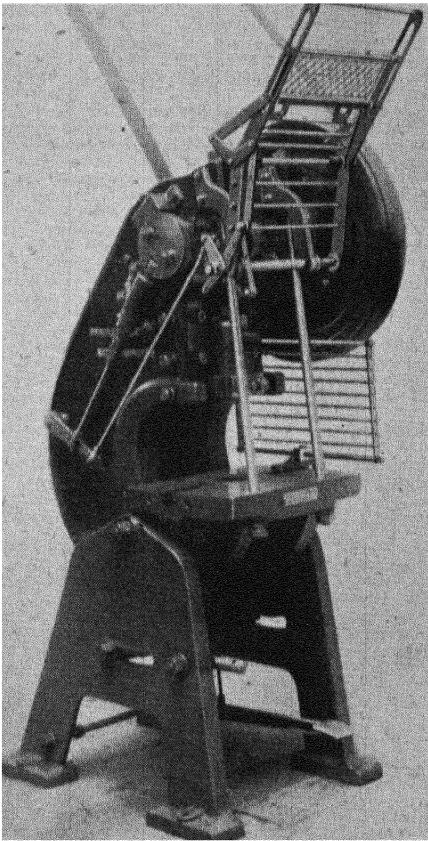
INTERLOCK GUARD SWUNG CLEAR FOR TOOL-SETTING
